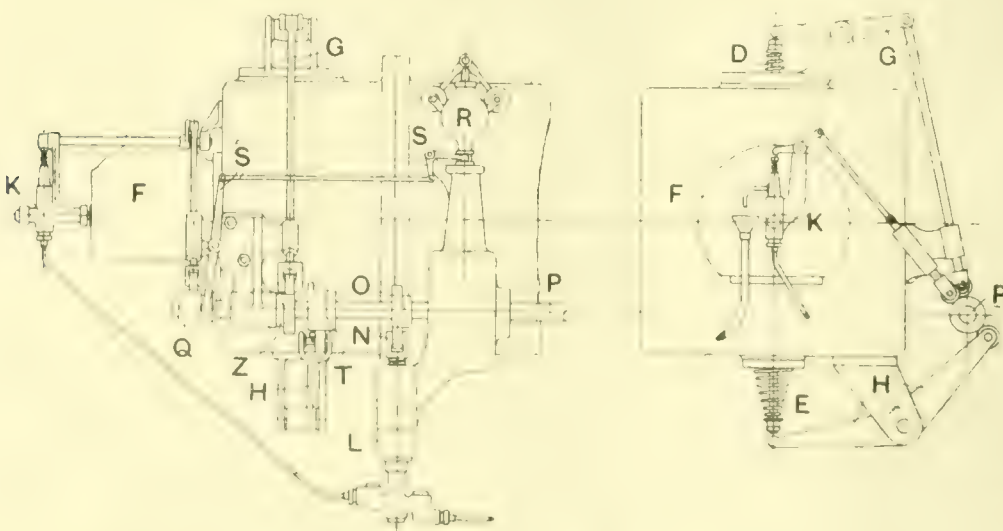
IMPROVED DESIGN OF OIL ENGINE.
